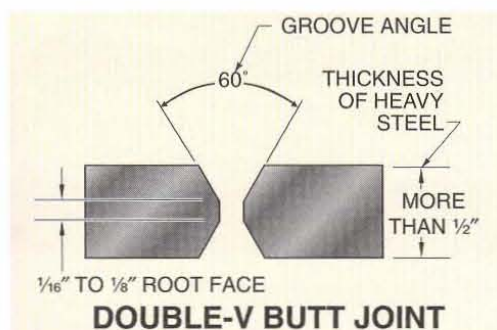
A double-V butt joint is required when a weld must be deposited on both sides of a joint.
